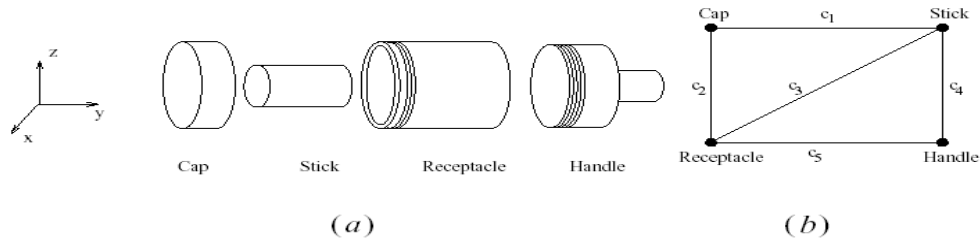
Exploded view of assembly (a), and graph of connections (b)
